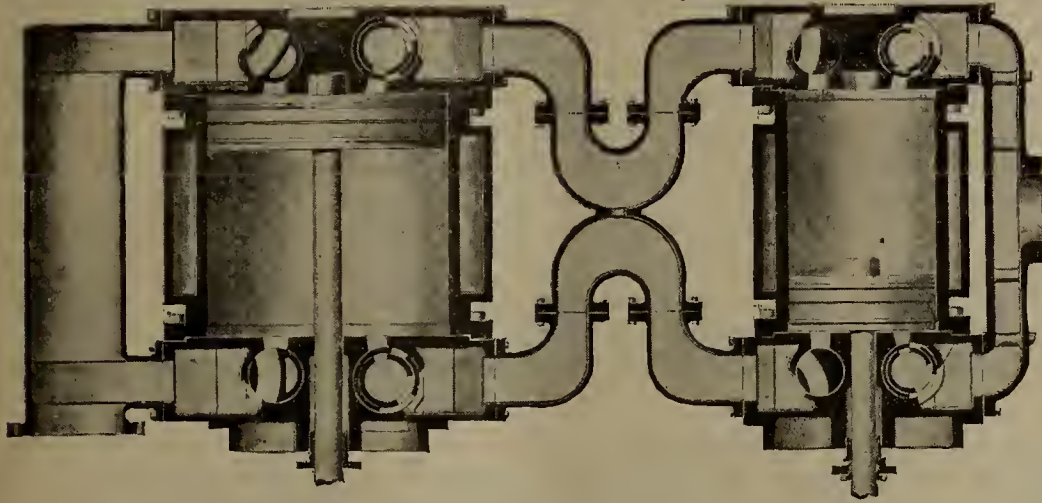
SECTIONAL VIEW OF CYLINDERS AND VALVES.
